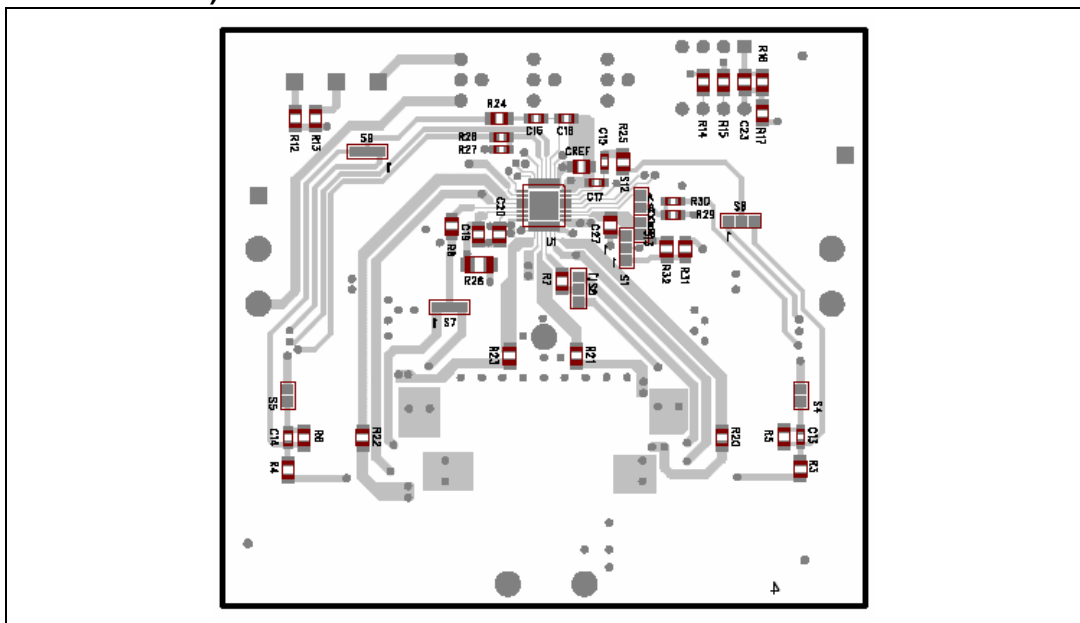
PM6680 evaluation board layout - bottom layer (PM6680 and component side)
